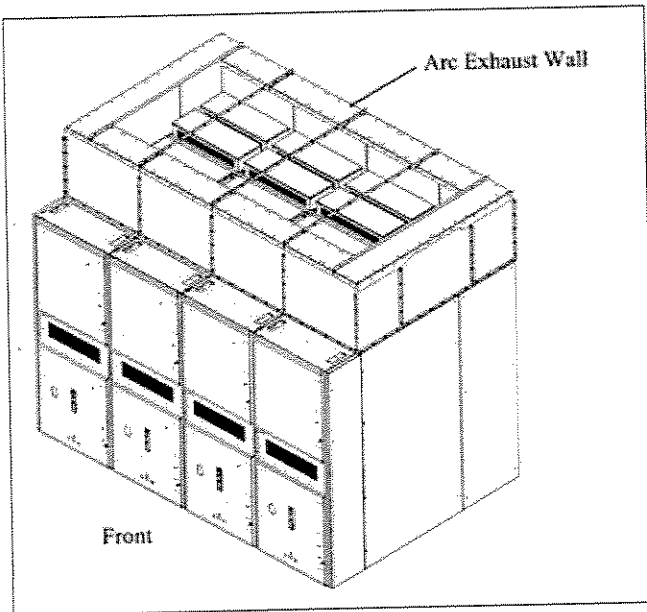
Typical Arc Resistant Switchgear Lineup with Arc Exhaust Wall.
